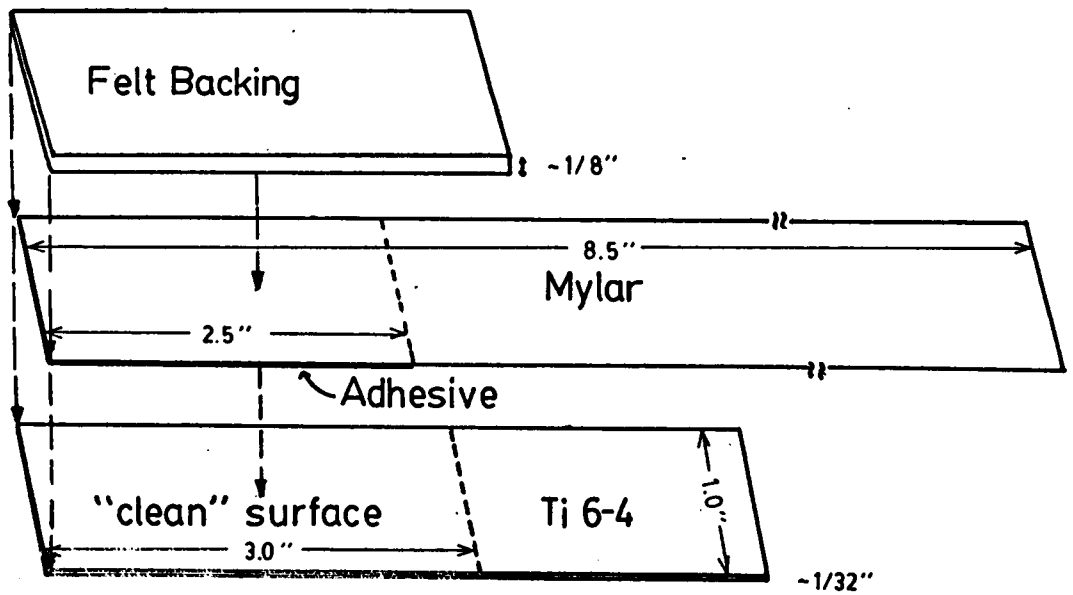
Schematic representation of the construction of the 180° peel specimen.
